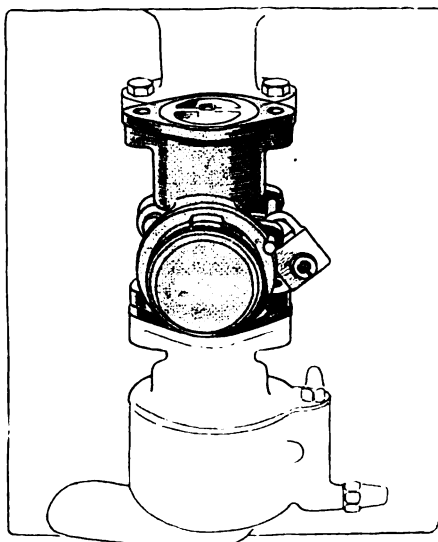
Kramer self-contained engine governor, which is placed between the carburetor and the intake pipe
